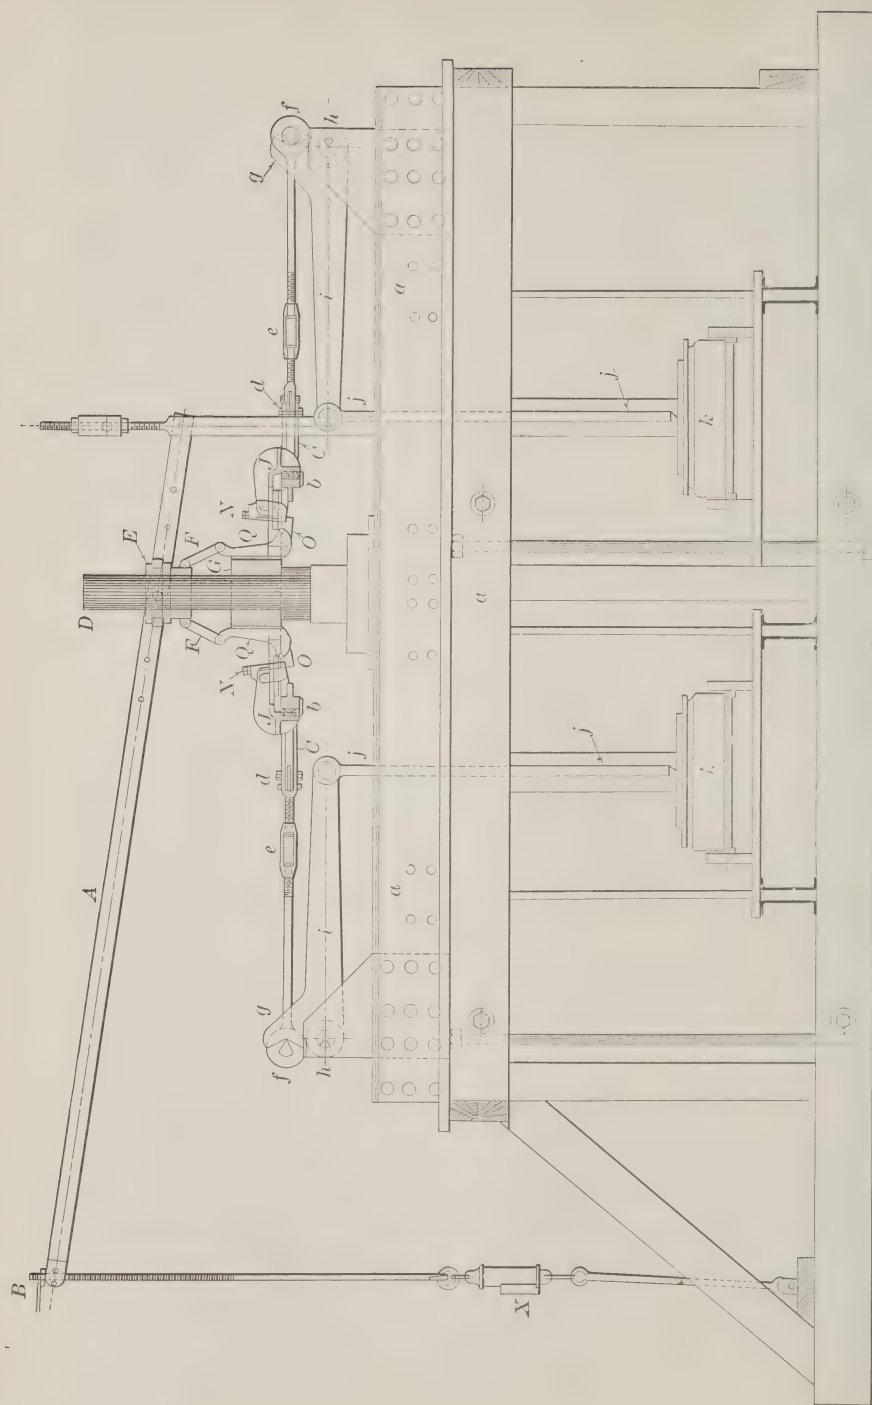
STATIC CLUTCH-TESTING APPARATUS
